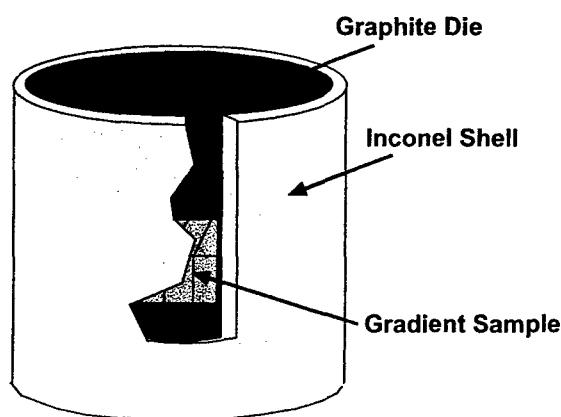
Cut away of die design for forging preforms and the combinatorial method.
